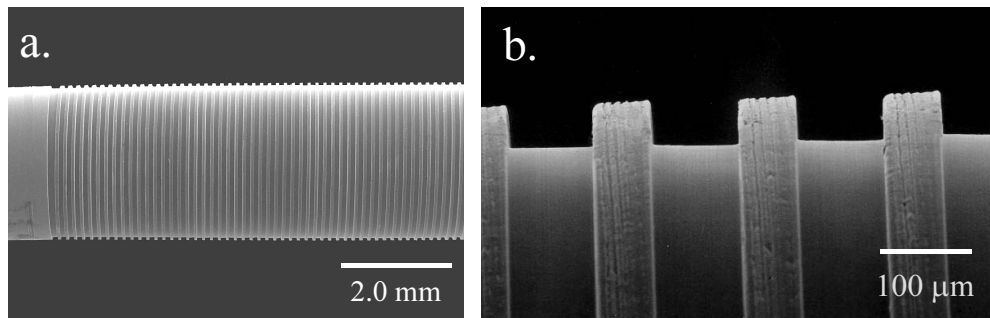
Groove machined in PEEK using focused ion beam-polished, custom ground lathe tool. (a) shows an image of the groove ending in a circumferential ring. (b) shows a high magnification view of the smooth helical feature.
